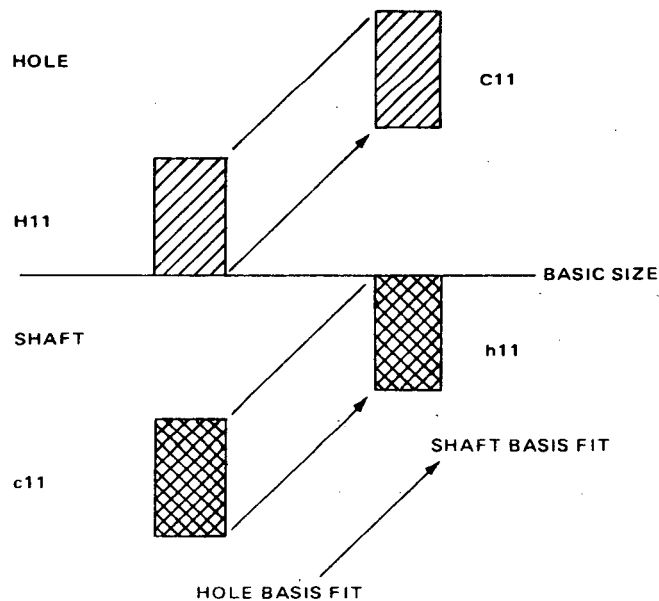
CONVERSION FROM A HOLE BASIS CLEARANCE FIT TO A SHAFT BASIS CLEARANCE FIT
